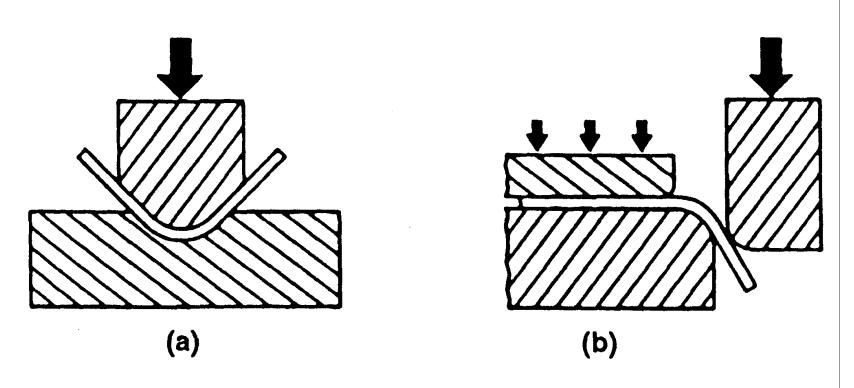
Basic bending tools (a) v-die. (b) Wiper die.
